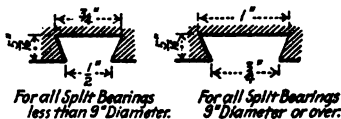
Method of Anchoring Babbitt Metal in Bearings.
